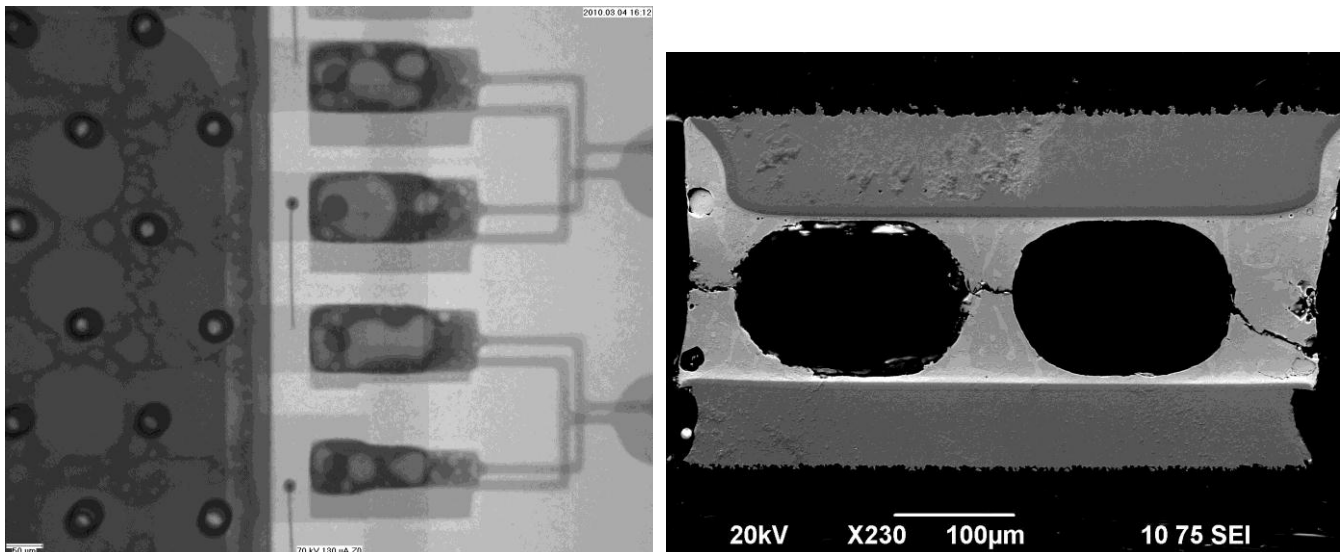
An X-Ray image and a SEM image showing voids in solder joints of a TOPS component on a thick Au board
